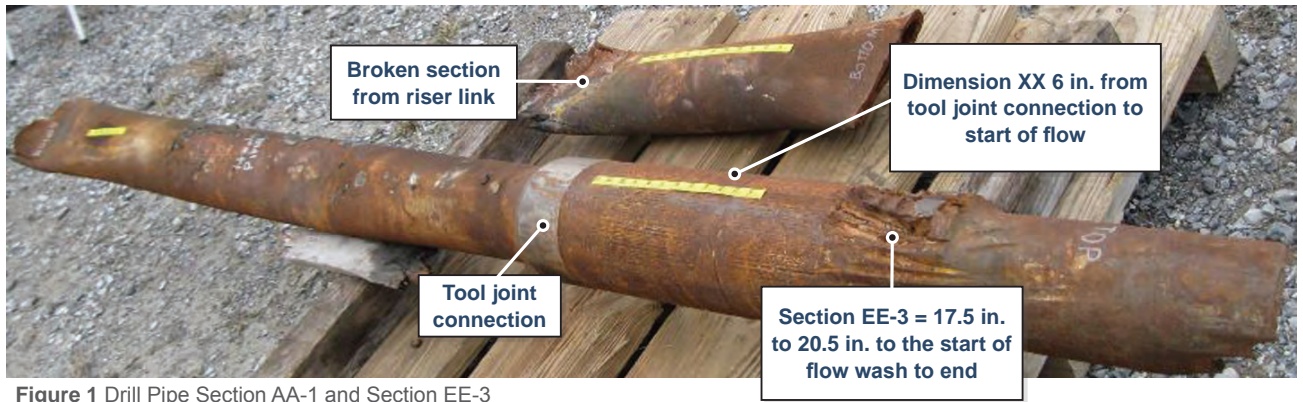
Drill Pipe Section AA-1 and Section EE-3
